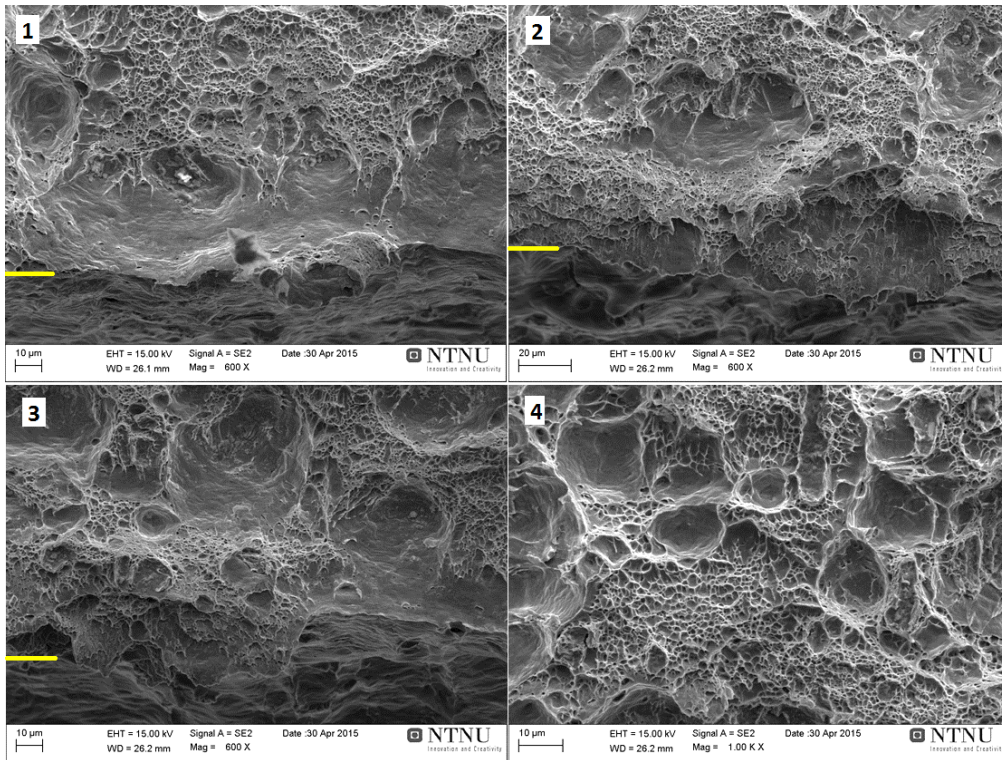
Sample B, test 3, BM section of specimen. The fracture surface is above the yellow line. The areas 1-4 are indicated in Figure 76 above.
